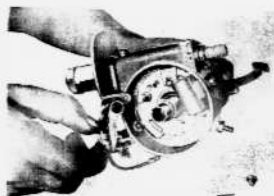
Removing Breaker W0863 Arm & Point Plate
